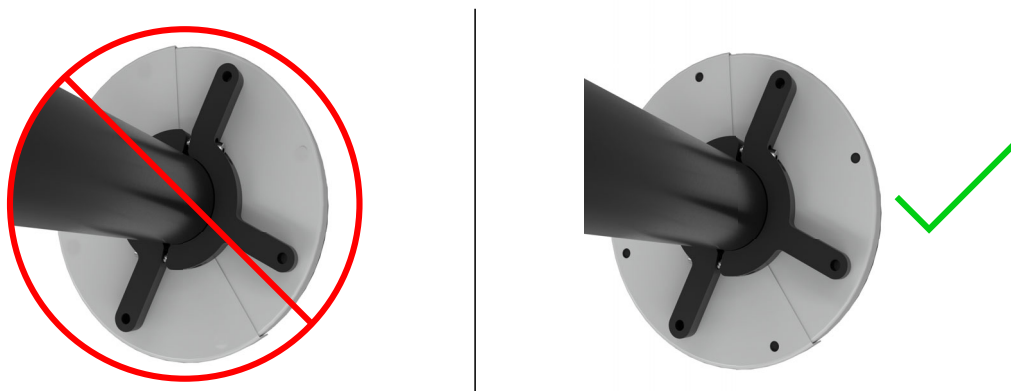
Rotate Bracket Screw Holes Away from Boot Screw Holes
